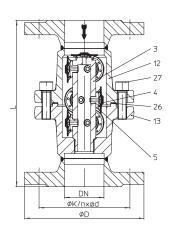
1....10K2 (DN40-50) with 10 capsules, with flanges -În-line design
